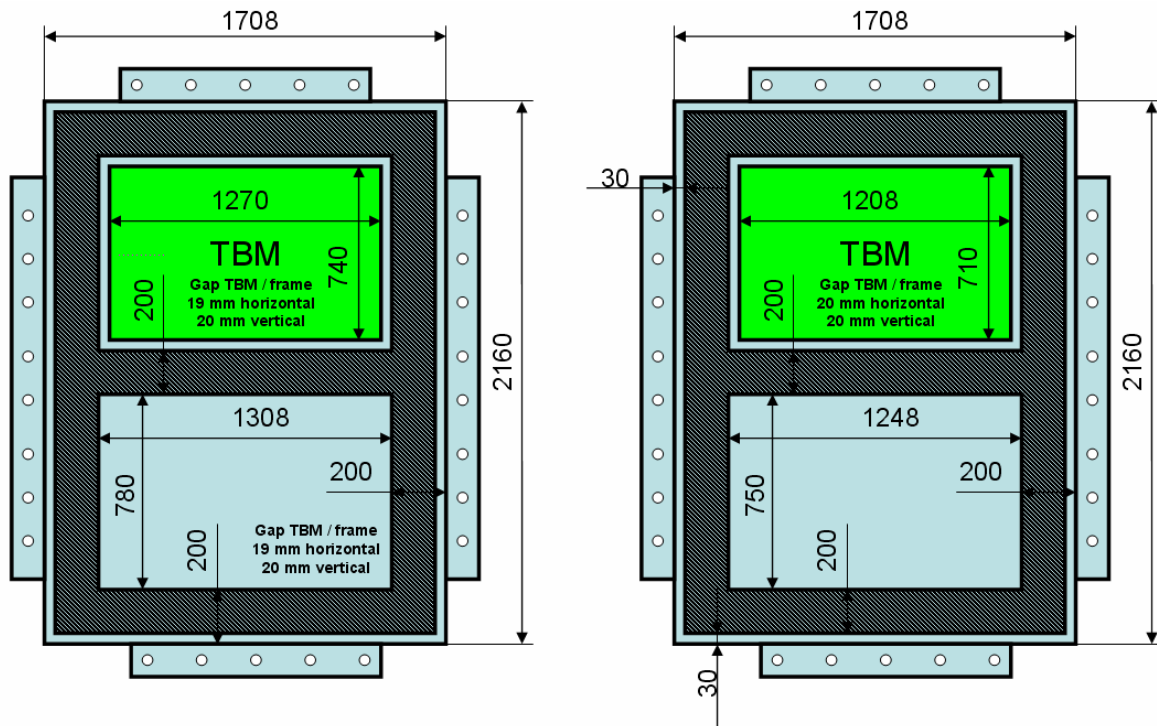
TBM and frame design, left: old design, right: reference TBWG-17.
